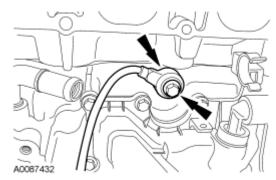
Locating Knock Sensor Bolt Courtesy of FORD MOTOR CO.
